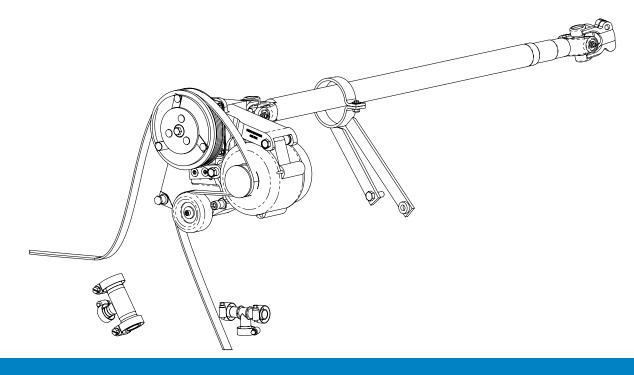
Power Pack Assembly - View 1 of 2 601-004-741 Rev. E
